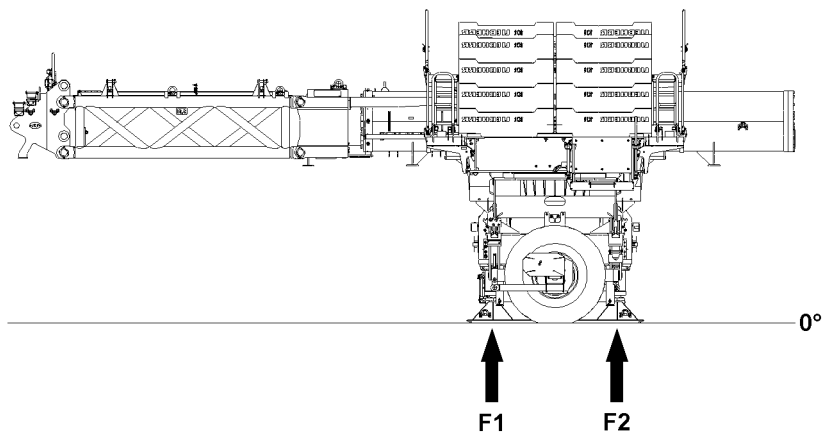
Turning off the ballast trailer during assembly / disassembly and ballast trailer radius 18 m
